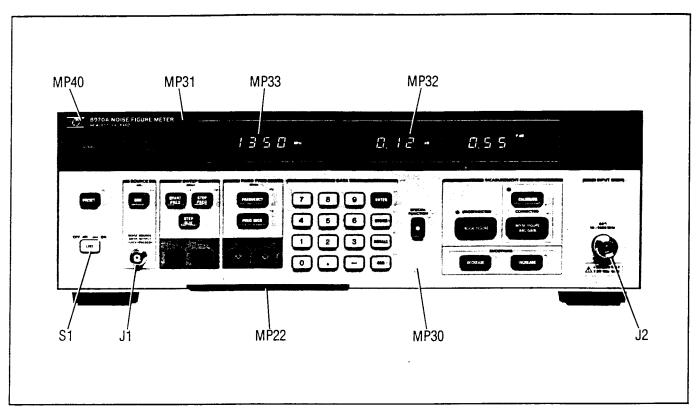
Chassis and Mechanical Parts Identification — Front Panel
